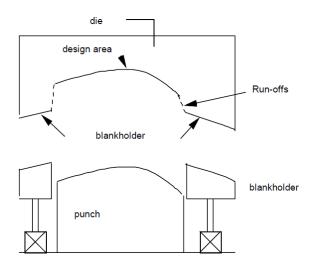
Schematic of a stamping tool. (Simtech, 2009)
